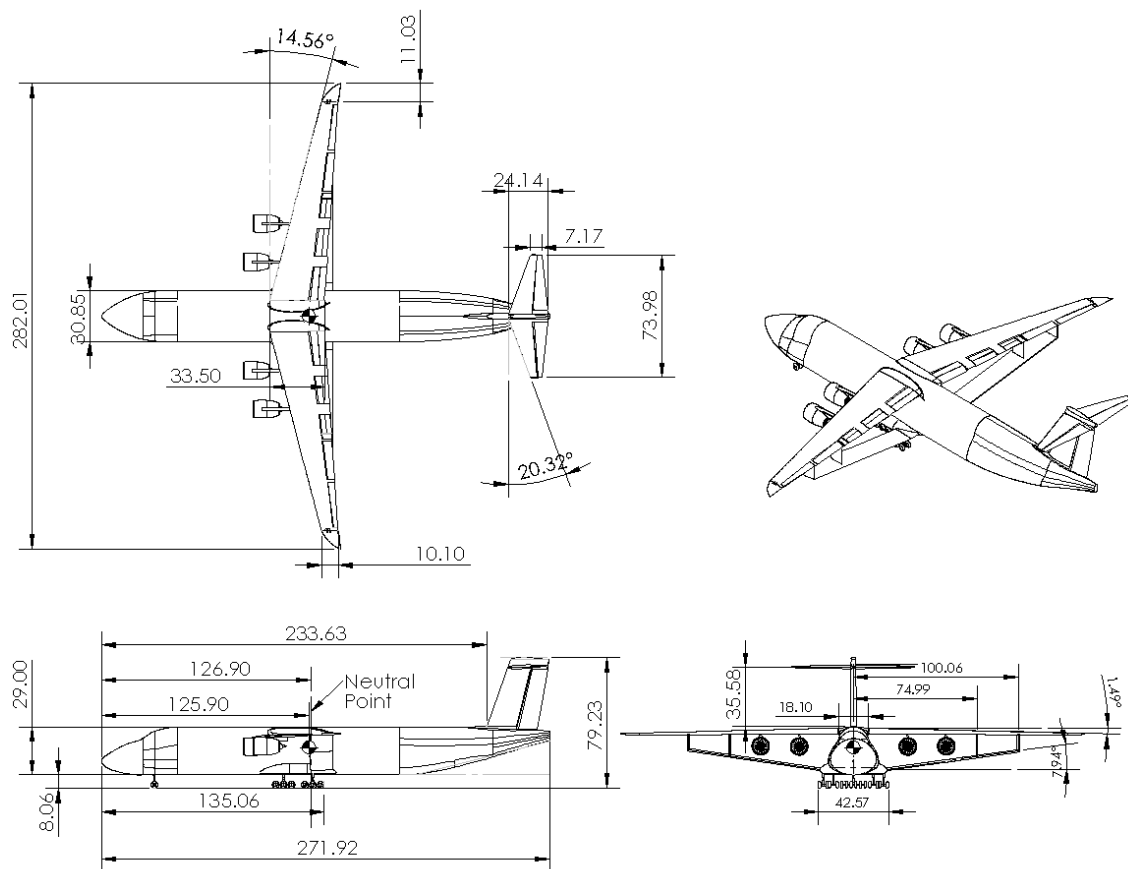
The PW-24 Harpy three-view drawing, all dimensions in feet.
